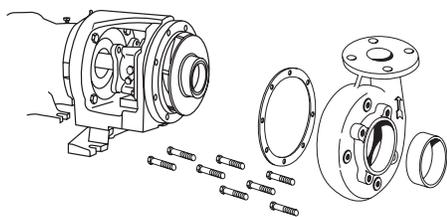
1520 Casing, Gasket, and Wear Ring Removed.
